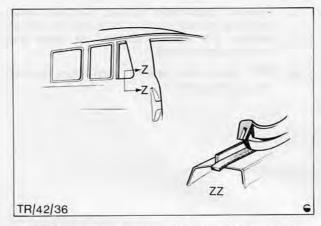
Quarter window weatherstrip assembly on aperture flange
